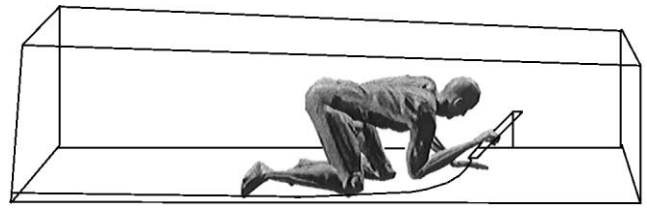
Schematic illustration of a welder in the honeycomb mock-up in a typical welding posture.
